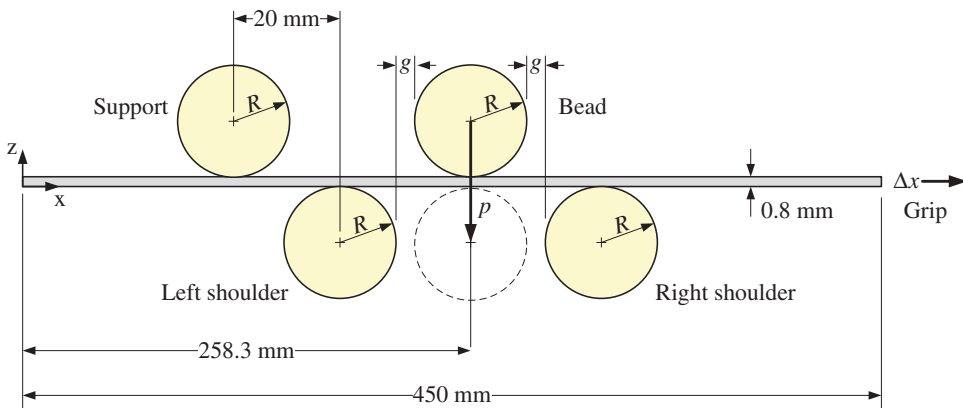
Scheme of the draw bead test (initial position), including the geometrical dimensions. The bead penetration is denoted by p while the horizontal grip displacement is denoted by Δx .
